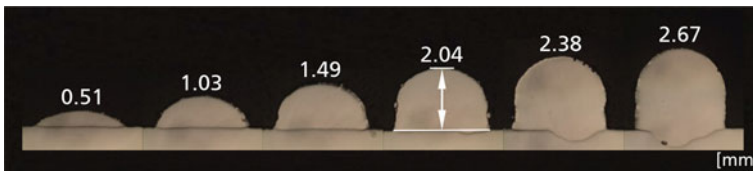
Cross-section polish of generated workpiece; cf. Fig. 39.21 and see text
